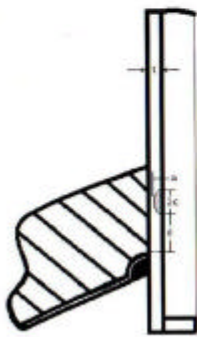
Inside, Axial Surface Flaws, .5" Above the Attachment Weld, Nozzle Downhill Side - Crack Growth Predictions
